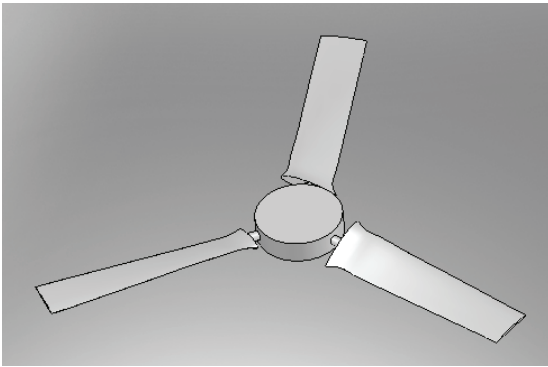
Three - dimensional geometric model of three-bladed propeller with the rectangular blades.
